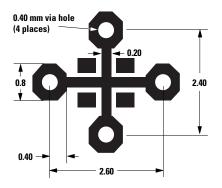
PCB Pad Layout, High Isolation MiniPak (dimensions in mm).
